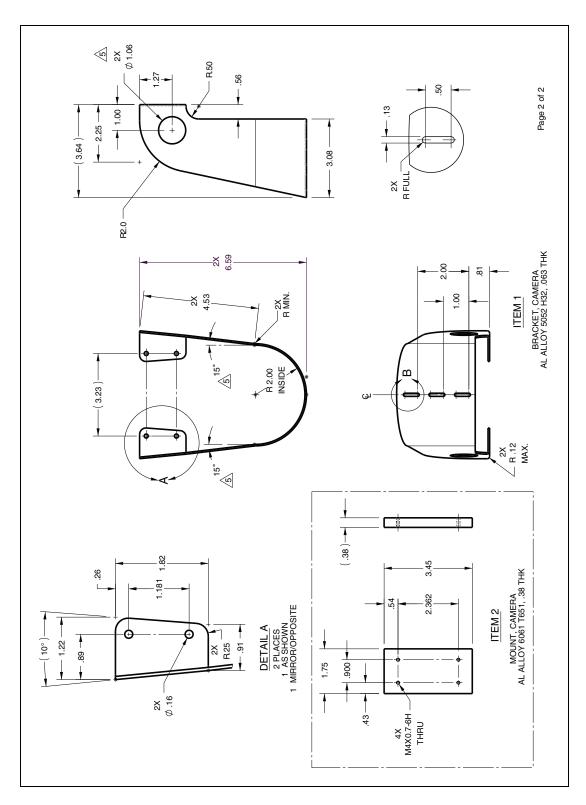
Camera Bracket Drawing, Page 2 of 2
